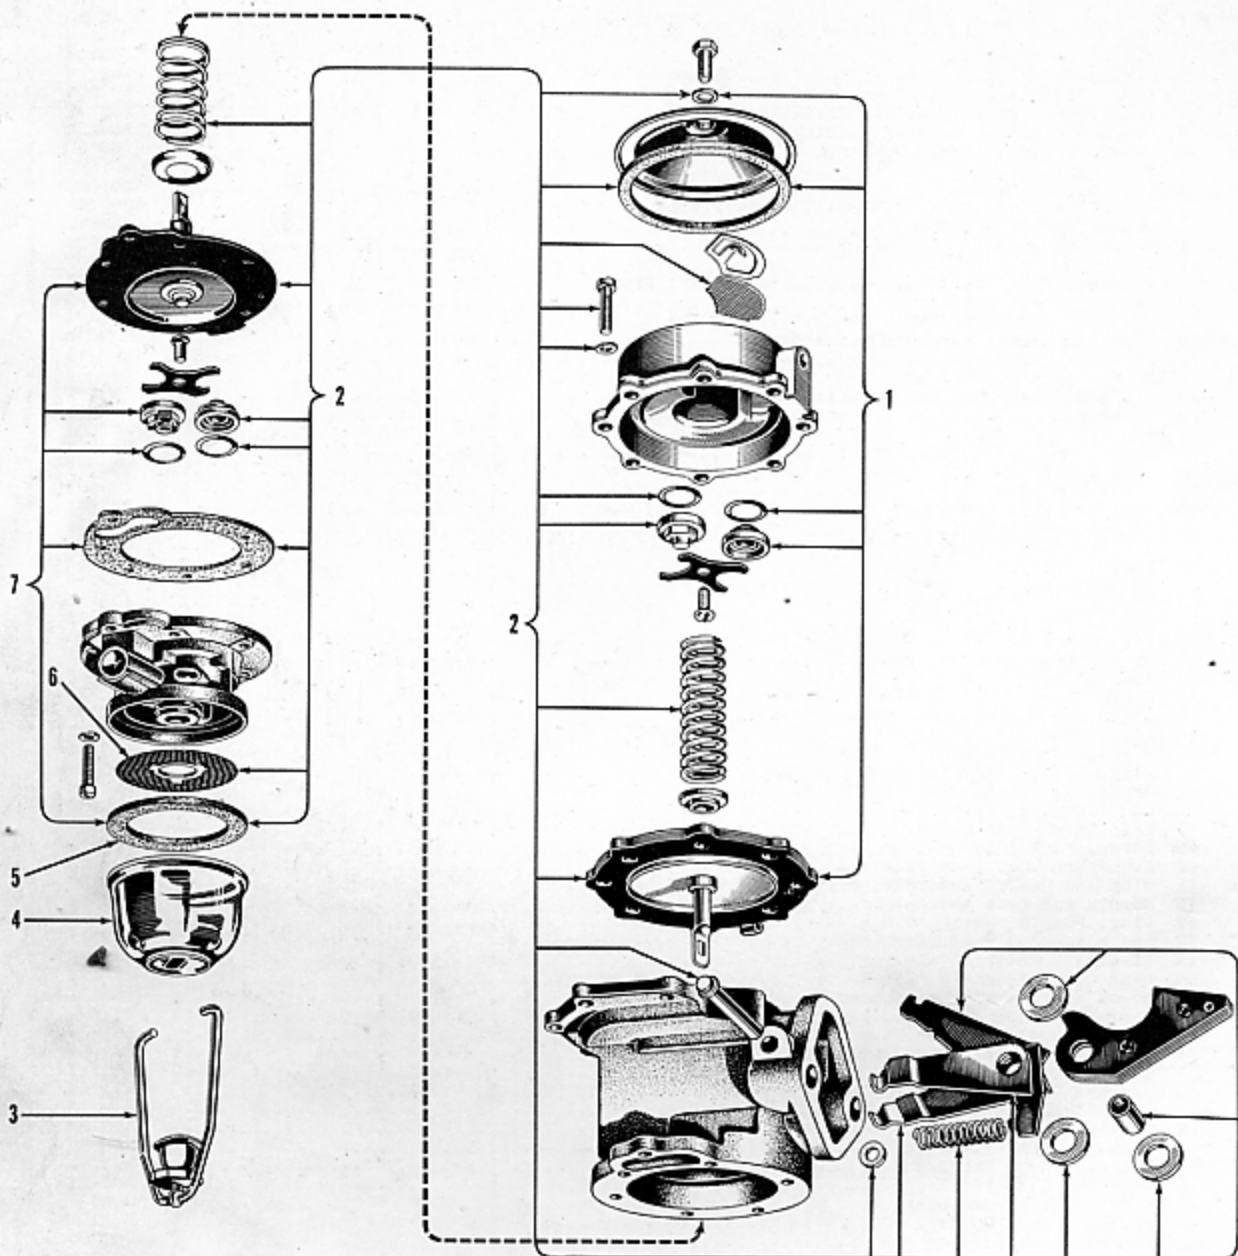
TYPICAL FUEL AND VACUUM PUMP - EXPLODED VIEW
